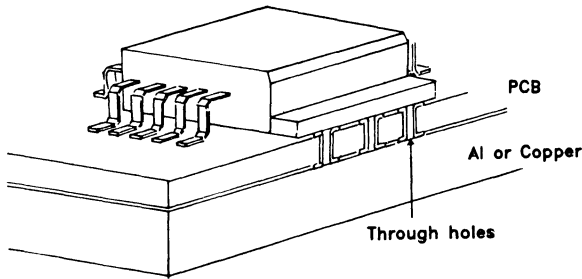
For power dissipation above 2W new surface mounting packages are being developed. This type, compatible with SO-package handling equipment, has a thermal resistance of about 5° C/W.
